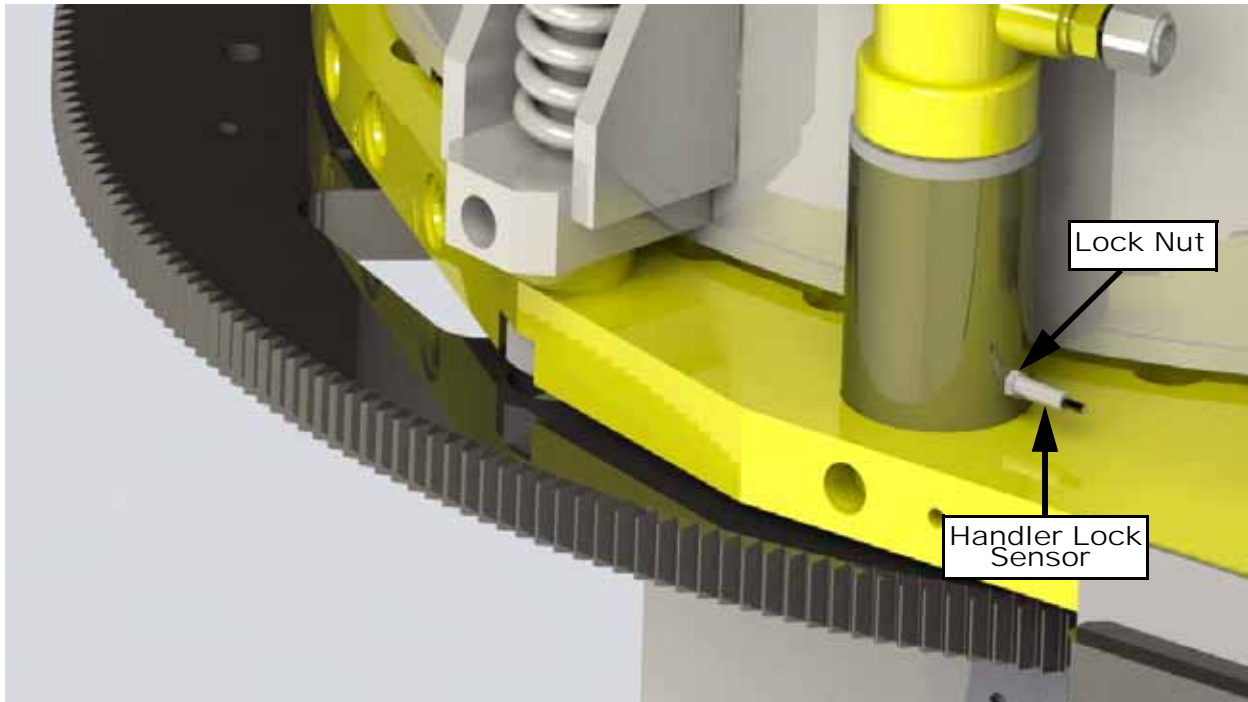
Loosen Lock Nut on Handler Lock Sensor.
